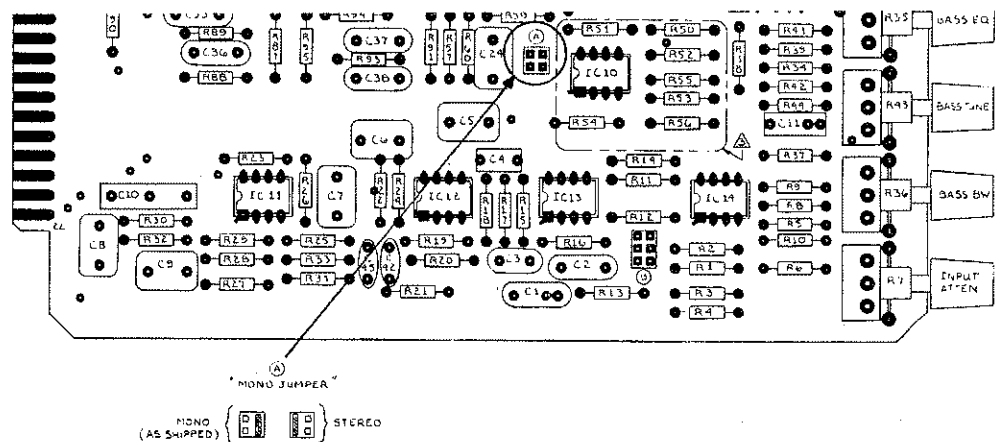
Stereo Conversion Jumper "A" -- Cards #4 And #5
